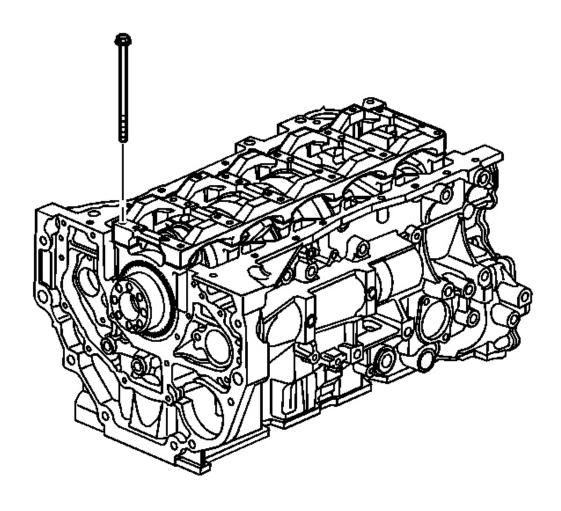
View Of Crankshaft Main Bearing Cap Bolt Courtesy of GENERAL MOTORS CORP.
